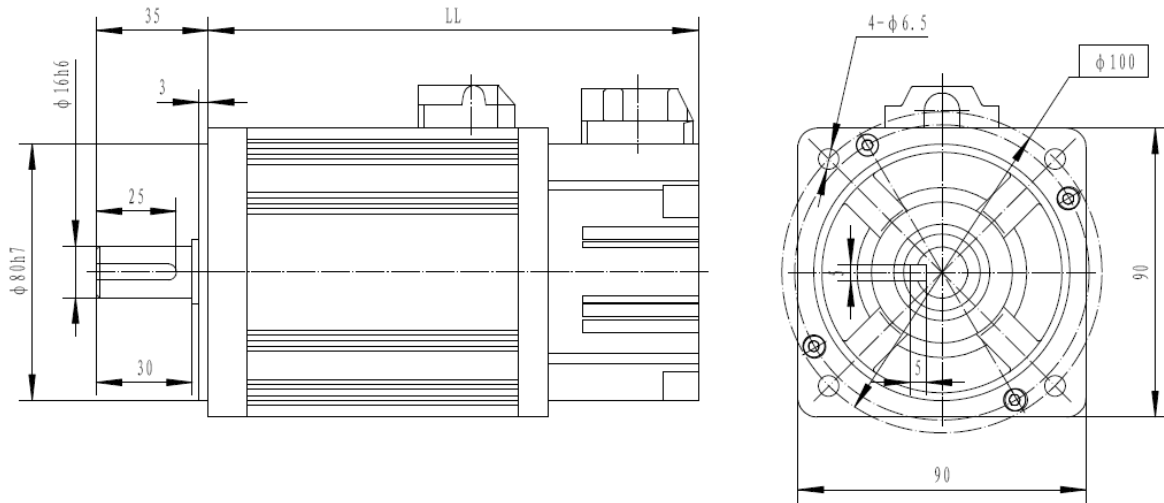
The dimension of 90 series AC servo motor (unit:mm)
